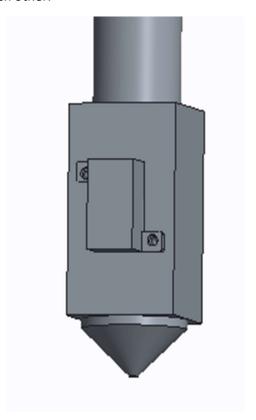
Assembly of the cylinder, nozzle and the heater piece.
